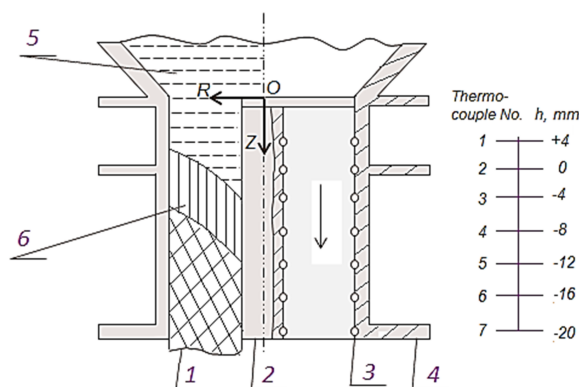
Scheme of molding solidification in the bushing. (1 – molding, 2 – mandrel, 3 – thermocouple, 4 – bushing, 5 – liquid slurry, 6 – zone of solidification).
